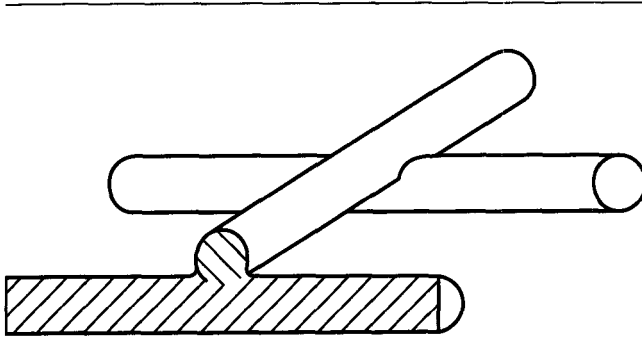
Section of a Typical Cross Wire Weld
